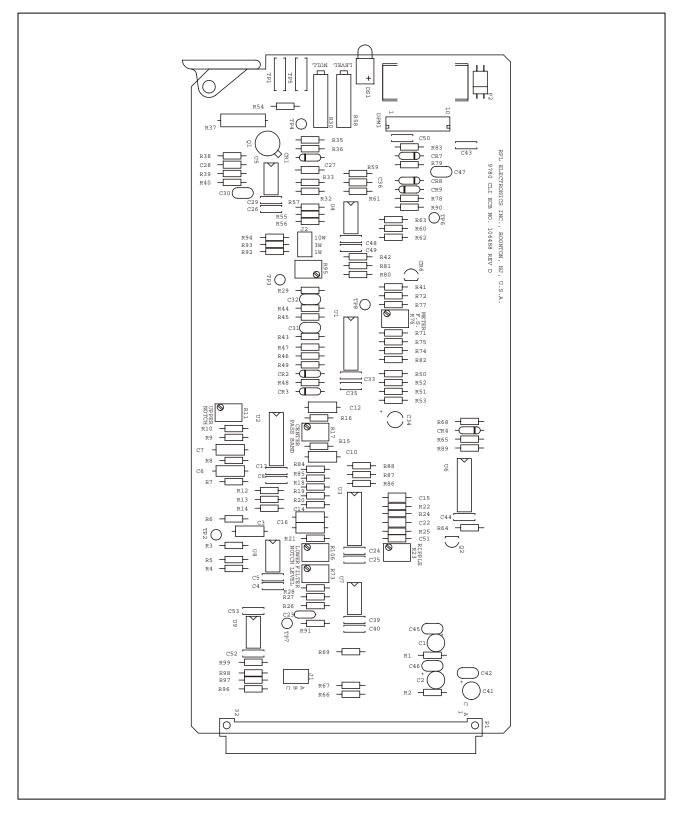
Component Locator Drawing, RFL 9780 Carrier Level Indicator Module (Assembly No. 106485)
